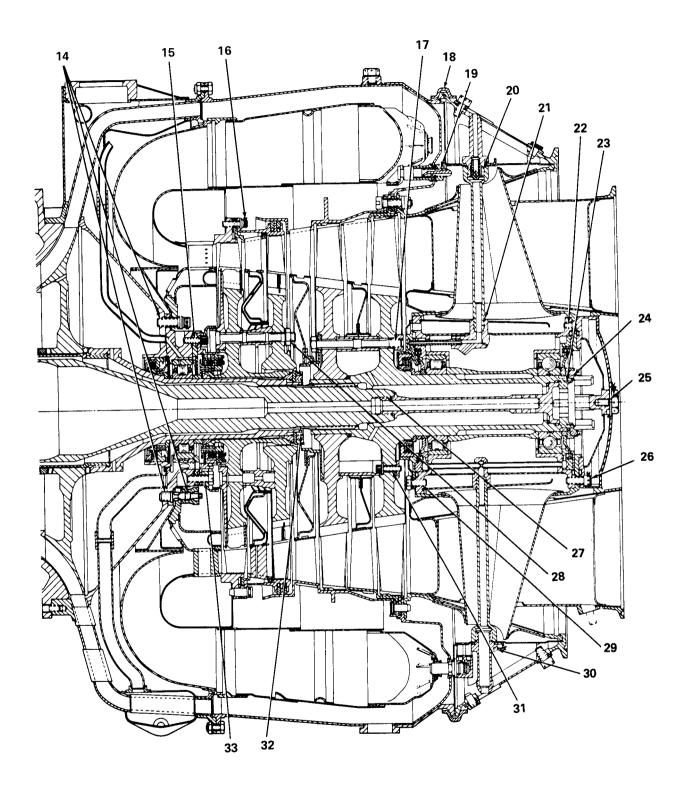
Special Torque Value Locations (T53-L-13B/703 Engines) (Sheet 3 of 5)
